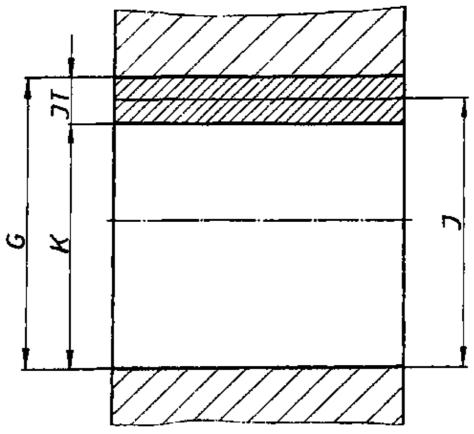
Tolerance representation at one side - internal dimension
